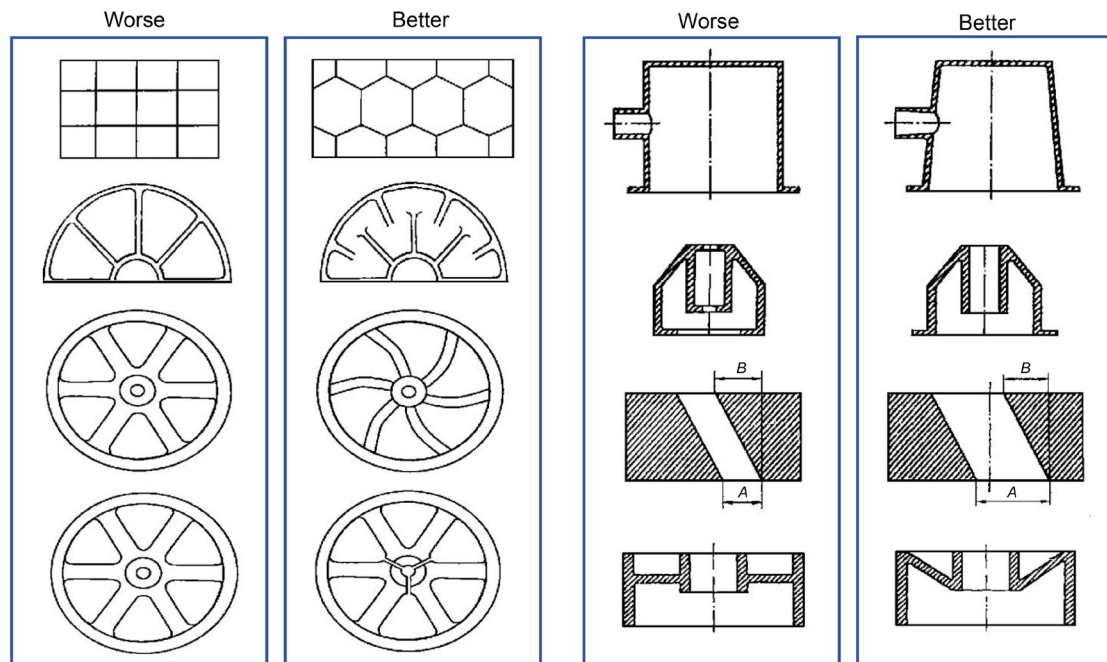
Some suggestions about how to layout the ribs on the die casting parts ^[127]
